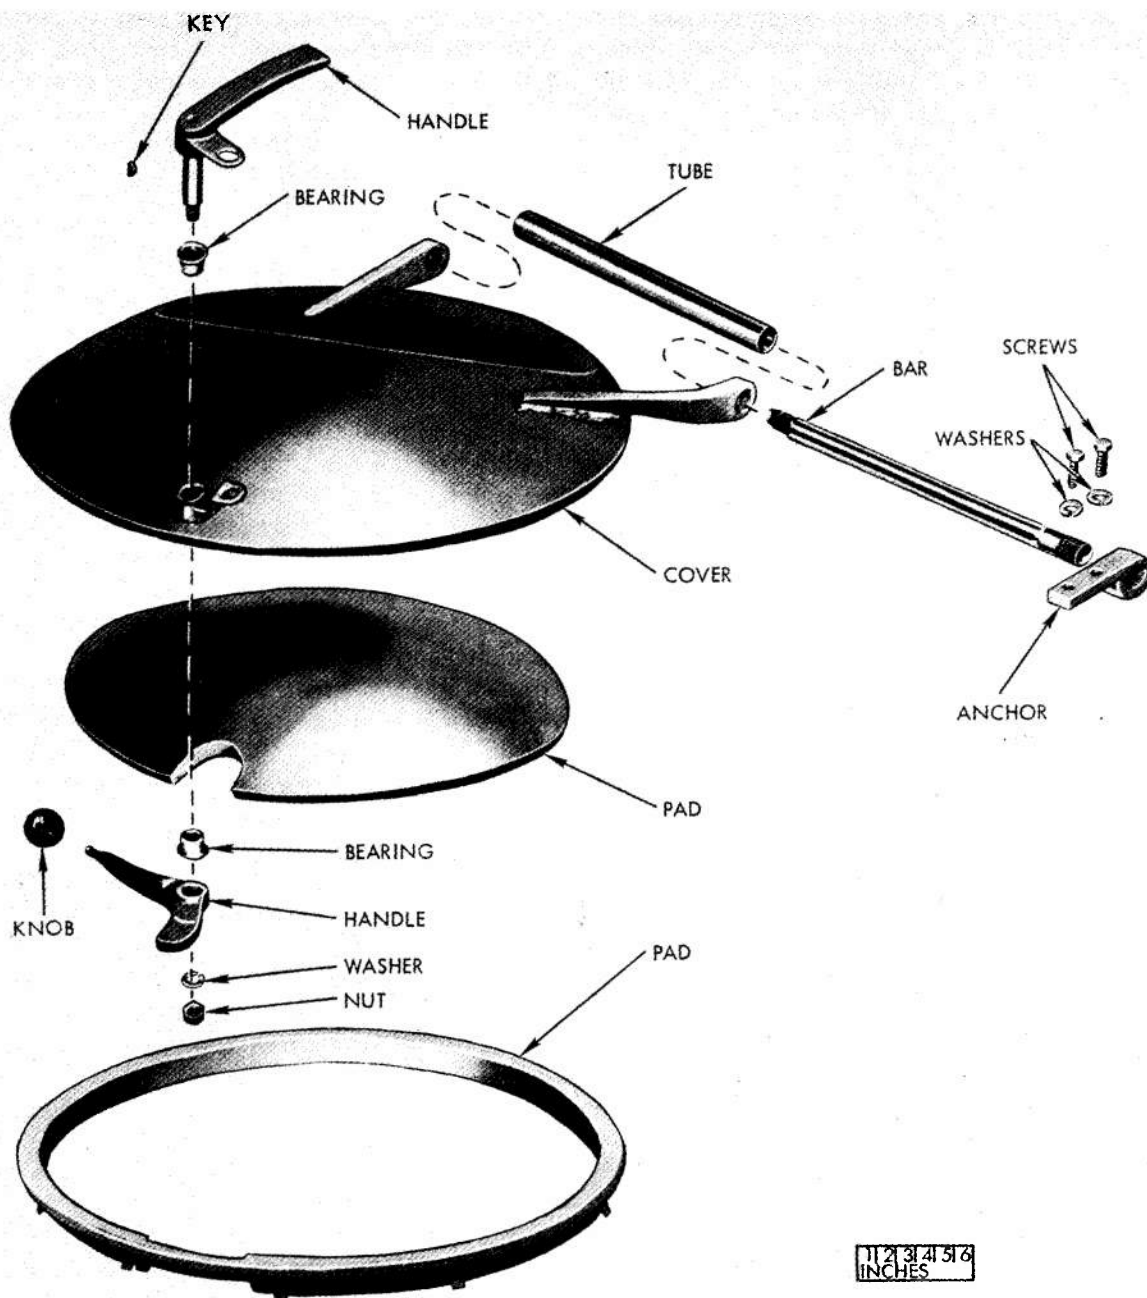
Exploded View of Driver's Cupola Cover, M107, 175 mm Self-propelled Gun
